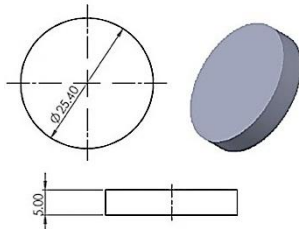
Workpiece before machining (25.4 mm diameter x 5mm Thickness)
